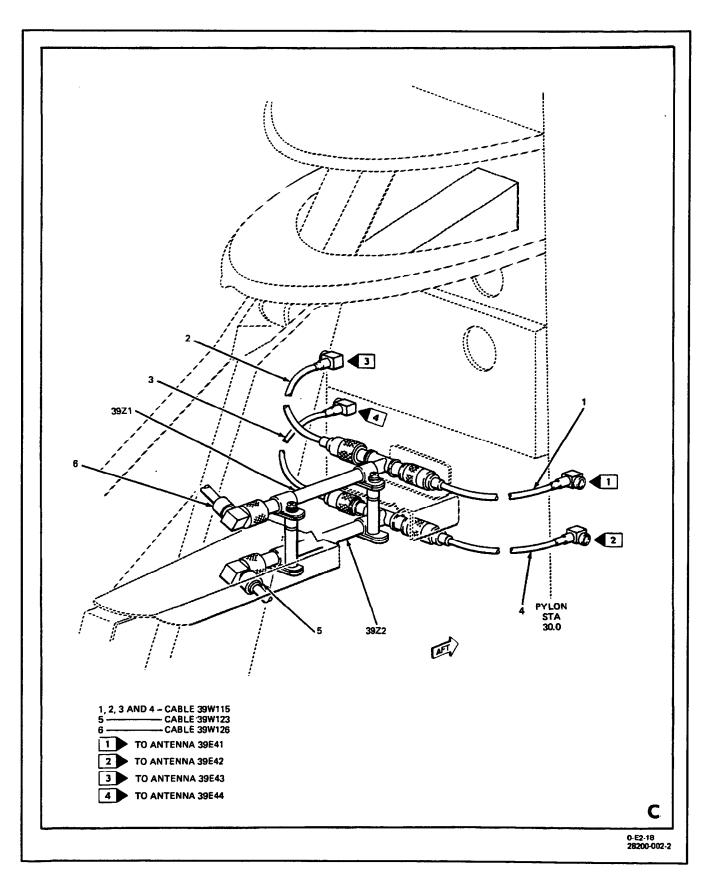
Removal and Installation of Configuration 2 Power Splitters and Cable Assemblies (Sheet 2)
